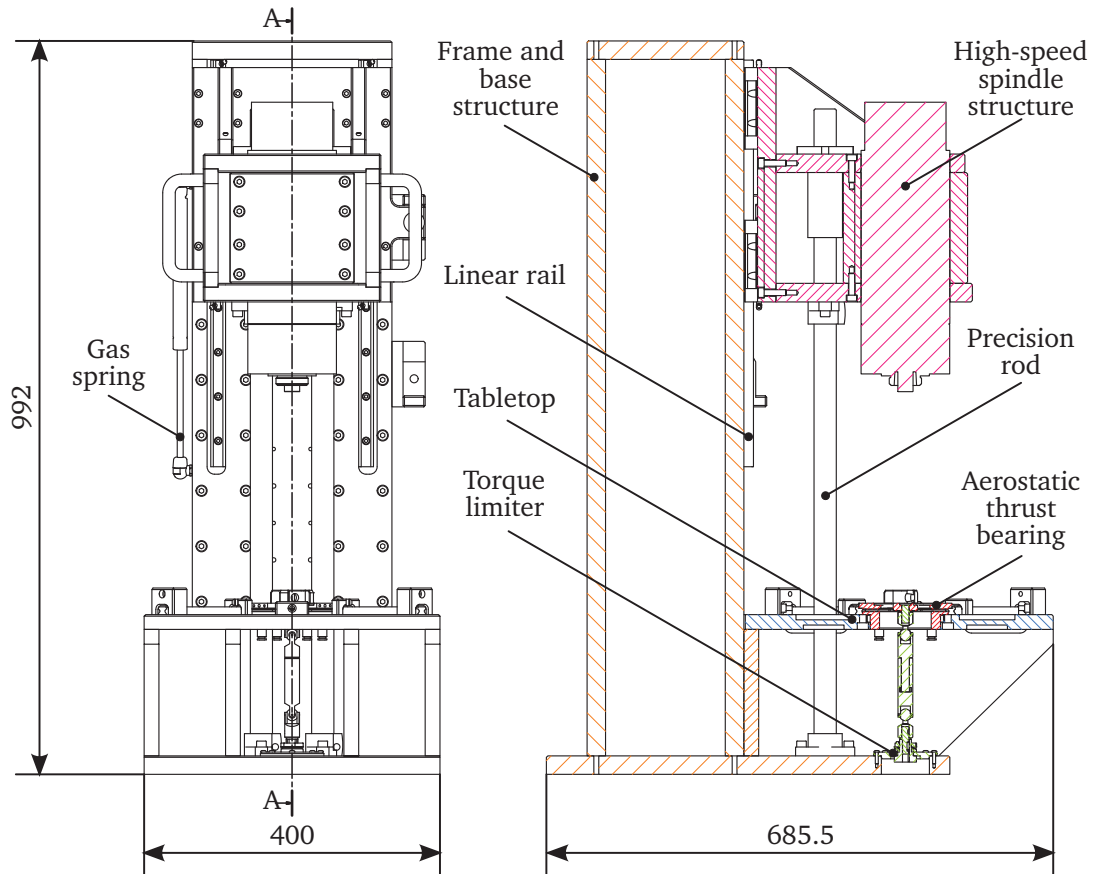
A section view of the frame structure and high-speed spindle module. The frame and base structure is hatched with orange, the magenta is the high-speed spindle and guide structure, the tabletop is blue, the red is the aerostatic thrust bearing and the green is the torque limiter and spline-hub joint.
